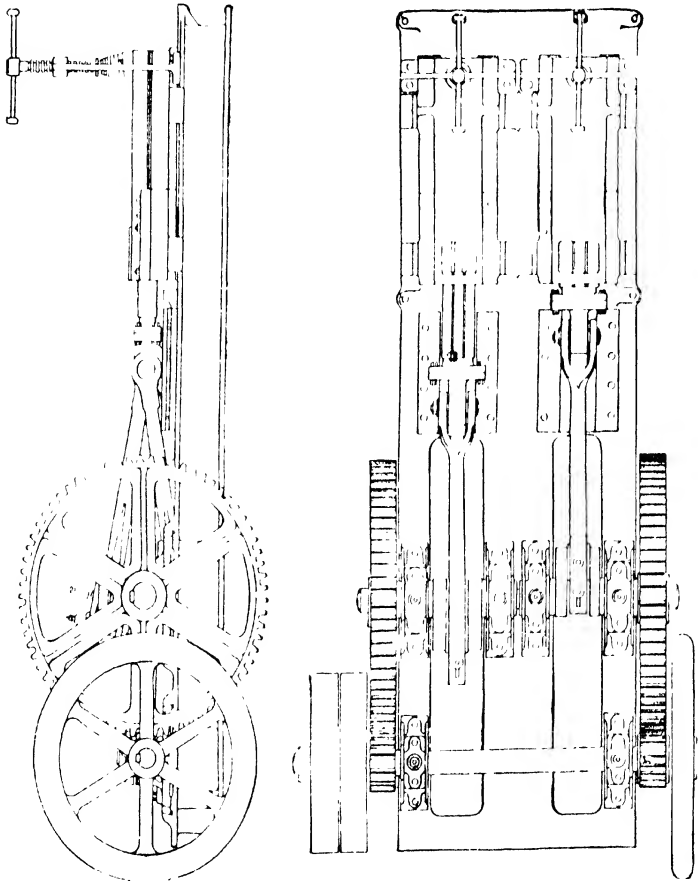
Bouriez twin-roller press. Longitudinal section and plan.
